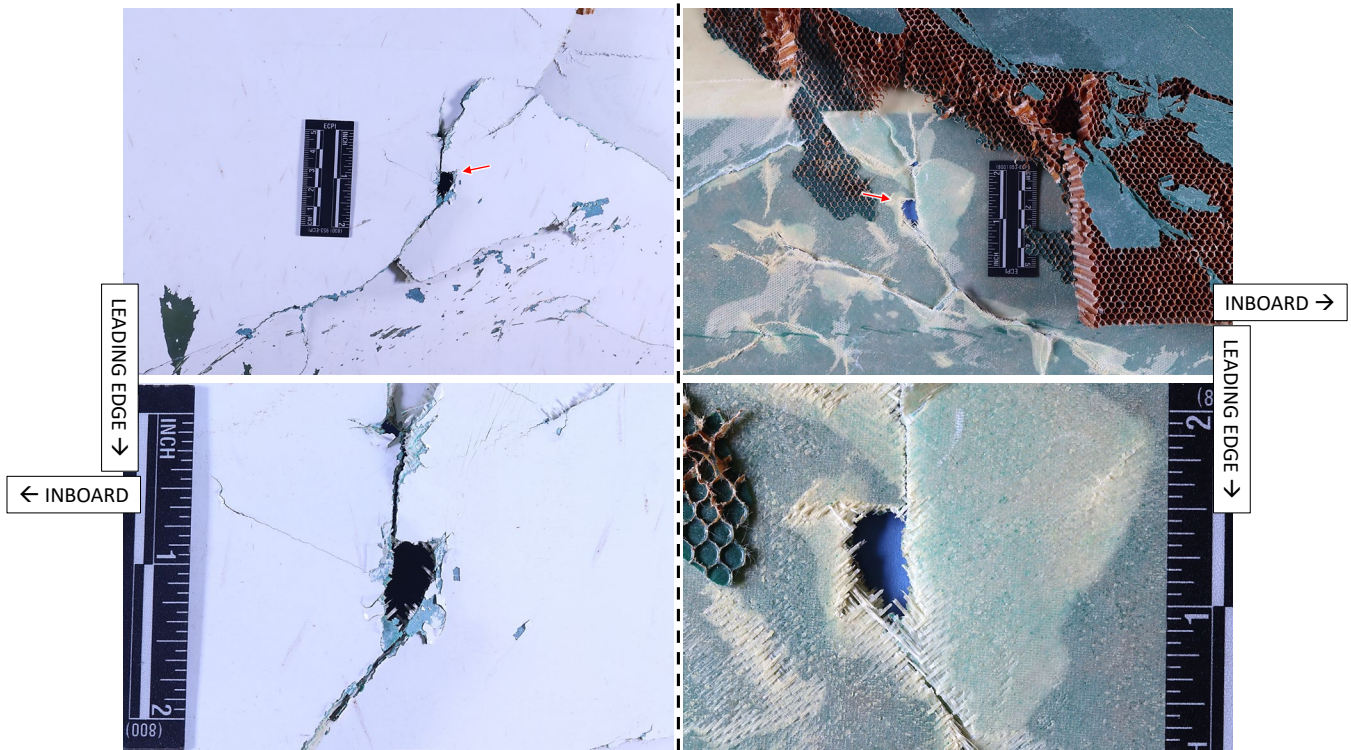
Closer photographs of the white blade lower skin hole feature (red arrow) viewed from the outer surface (left) and inner surface (right).
